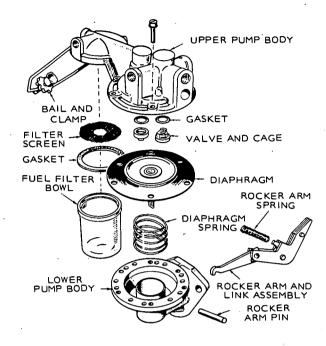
EXPLODED VIEW OF J-SERIES PUMP
